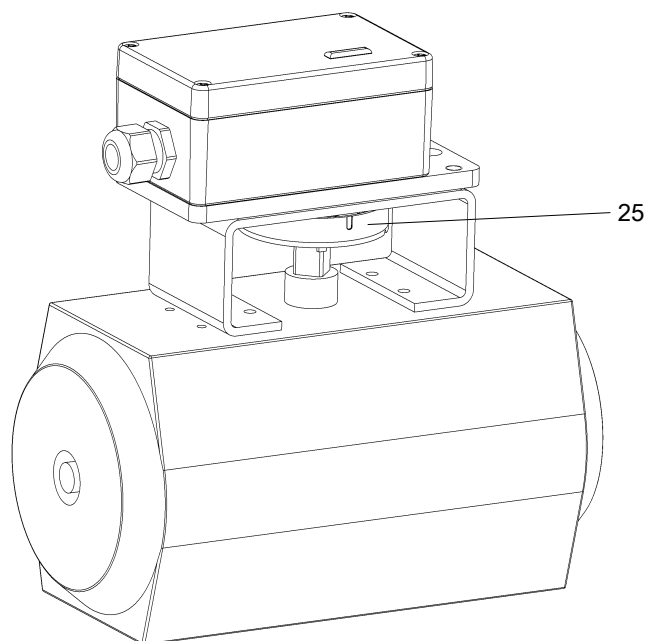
Positioner with mounting bracket fitted on rotary actuator
